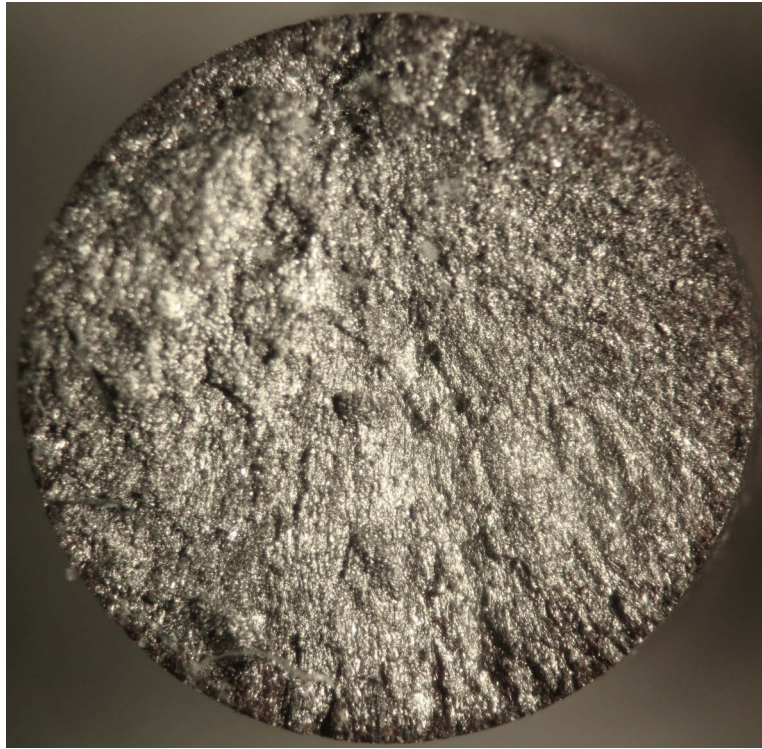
Fracture surface of specimen after three point loading. Fracture surface is located in the white iron region of the test specimen.
